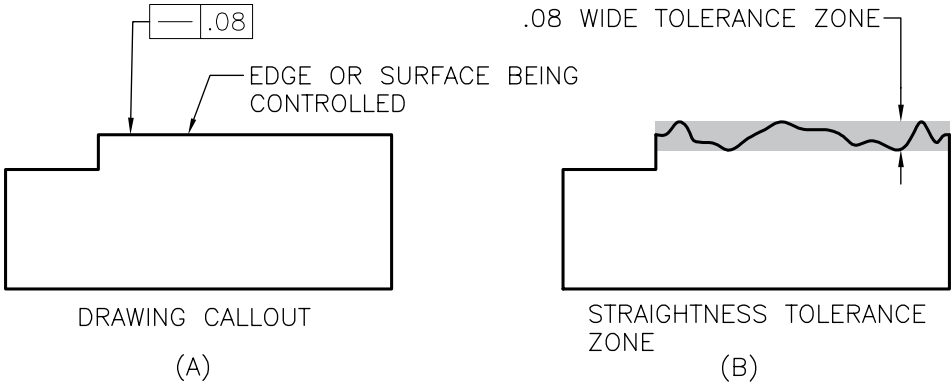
Straightness tolerance applied to a flat surface
